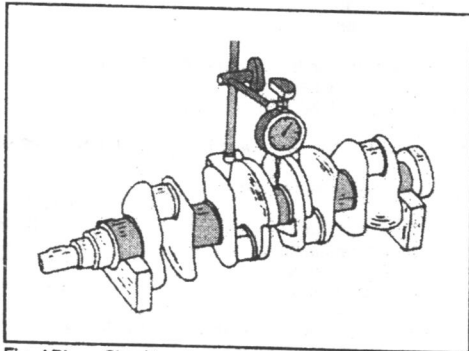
Checking the crankshaft for run-out. Place the two end journals into "V" blocks.
